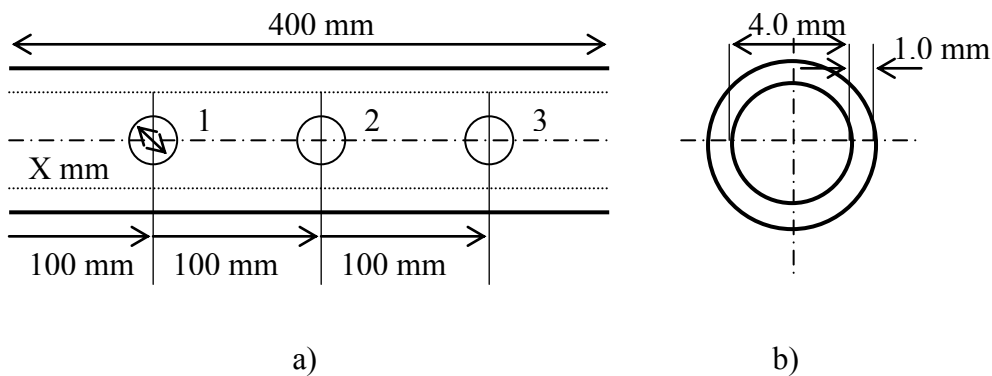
Multi-hole test sample a) longitudinal cross section b) end view
